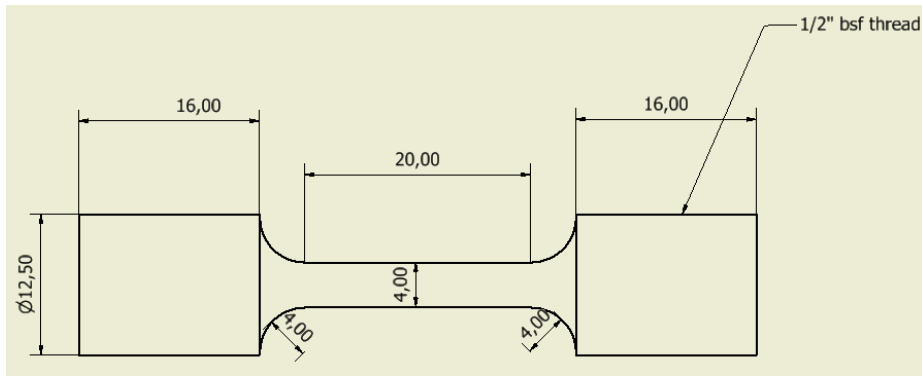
A drawing of the dimensions of the tensile test specimens used in this work in accordance with standard ASTM E8
